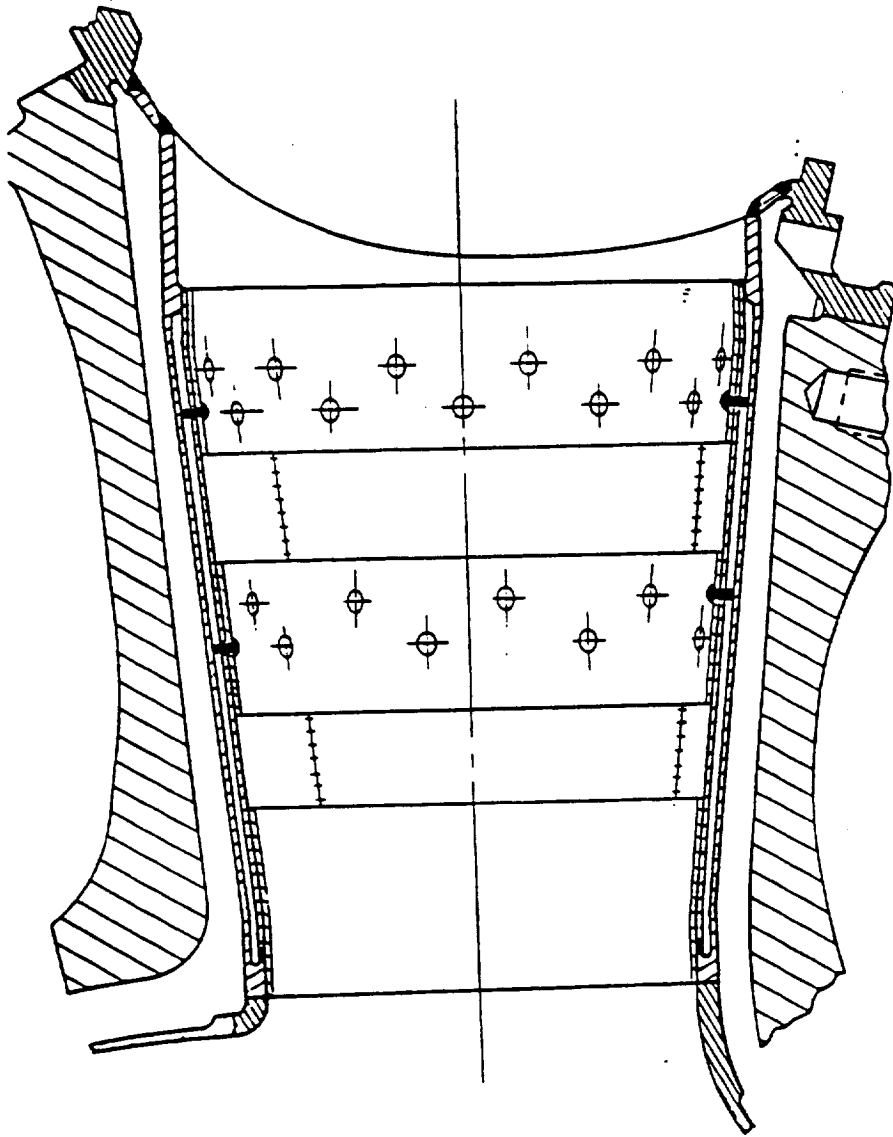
Center Transfer Tube Liner with Doubler and Button Configuration
